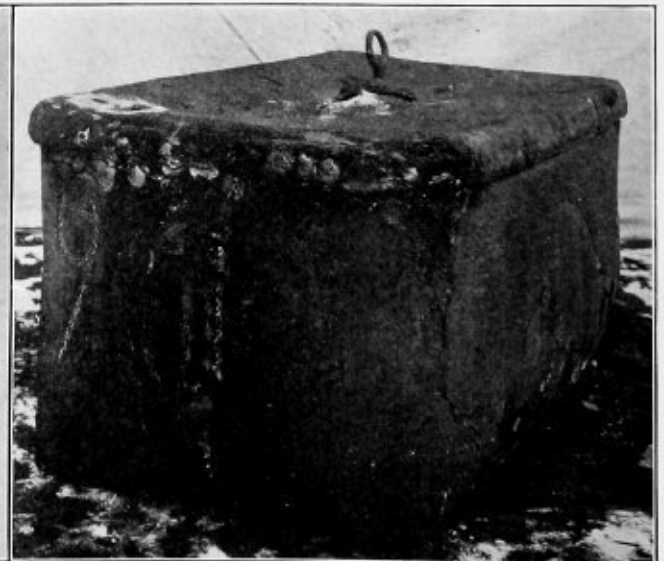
Annealing Box, With Hole Welded in Corner, Rivets Built Up and Plates Welded and Filled in at Joints
